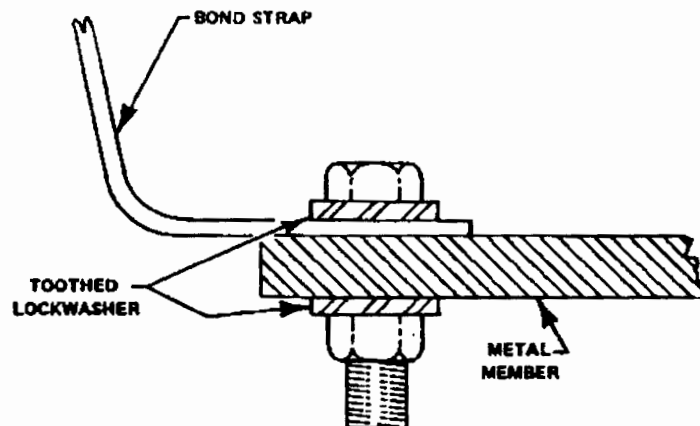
ORDER OF ASSEMBLY FOR BOLTED CONNECTION
